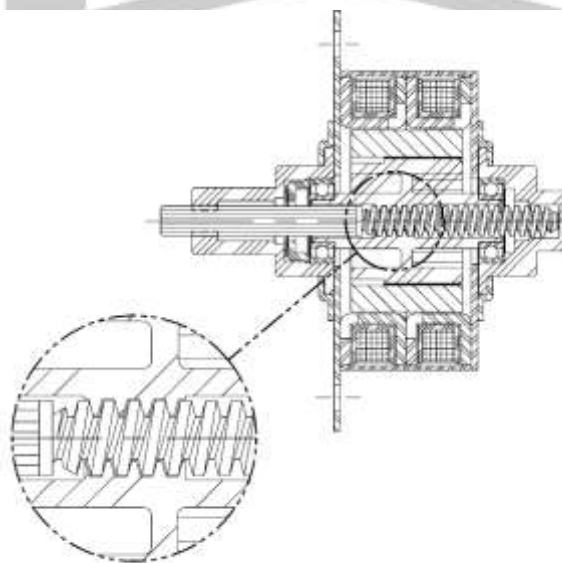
Linear actuator cut away showing threaded rotor to leadscrew interface.
